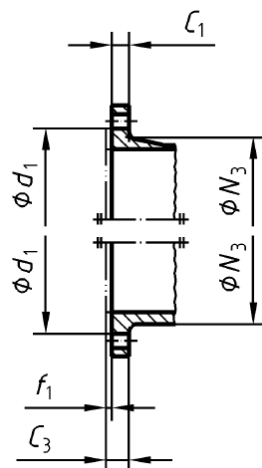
Flange of type 21 - incorporated flange (i.e. incorporated into a component or device)
